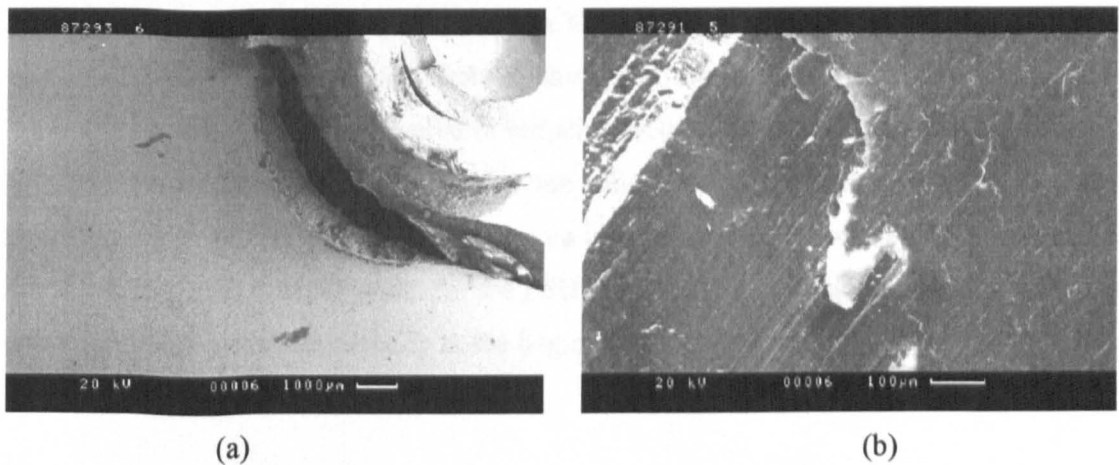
after 604,403 cycles at 3.0kN of a FSH52 fastening (a) no fretting scars on the pierced sheet, (b) damaged surface of the PTFE tape.
